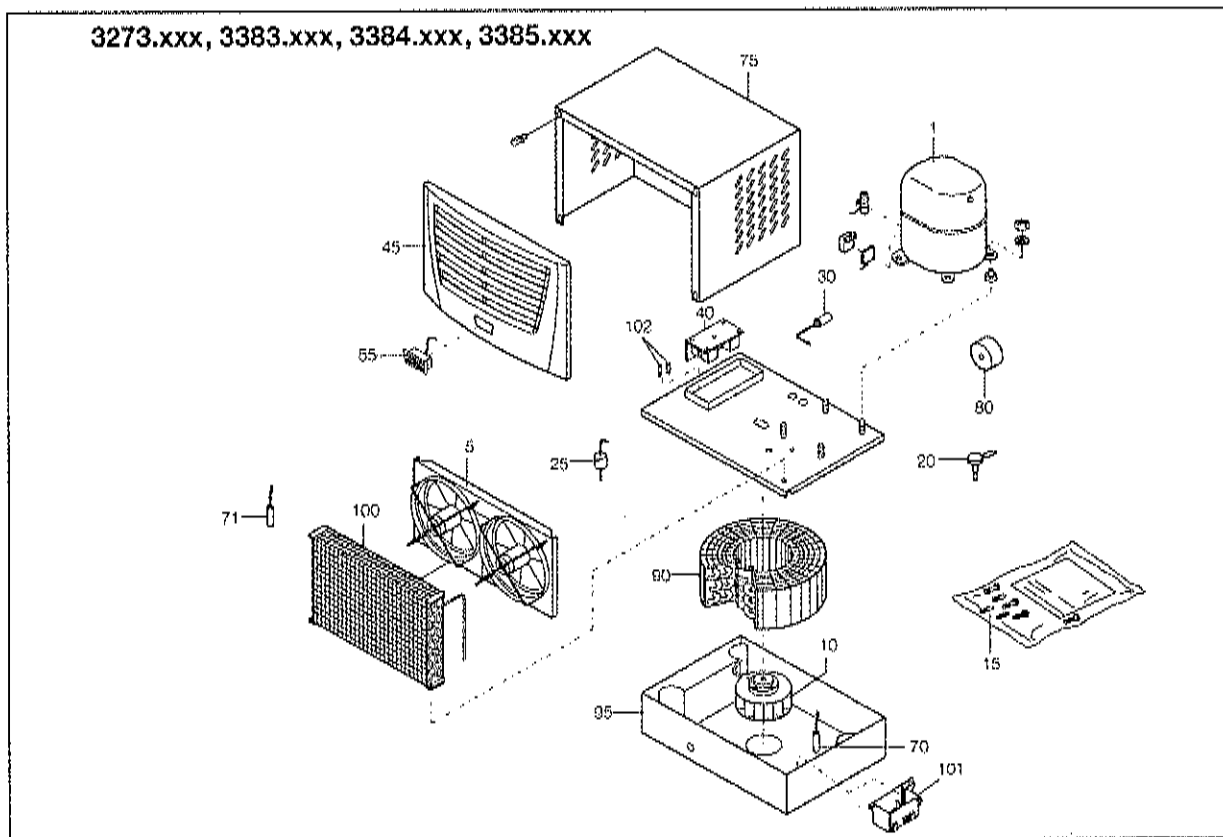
Spare parts for 3273.xxx, 3383.xxx, 3384.xxx, 3385.xxx
